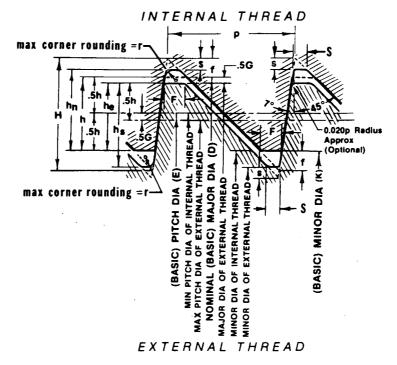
FORM OF 7°/45° BUTTRESS THREAD WITH 0.6p BASIC HEIGHT OF THREAD ENGAGEMENT AND FLAT ROOT
